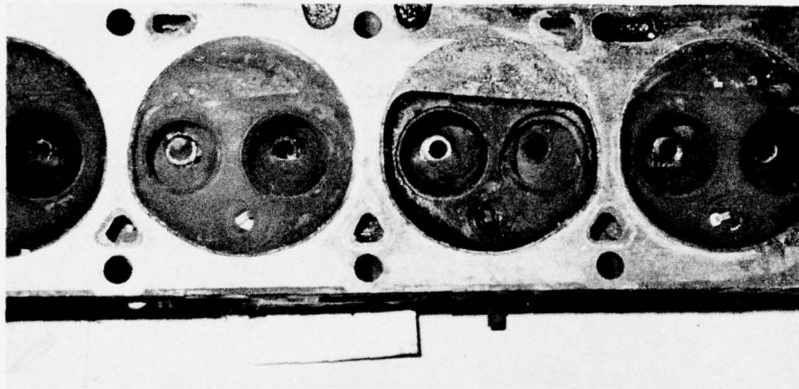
1967 FORD 5-TON, 361 CID ENGINE SHOWING VALVE SEAT INSERT FAILURE
